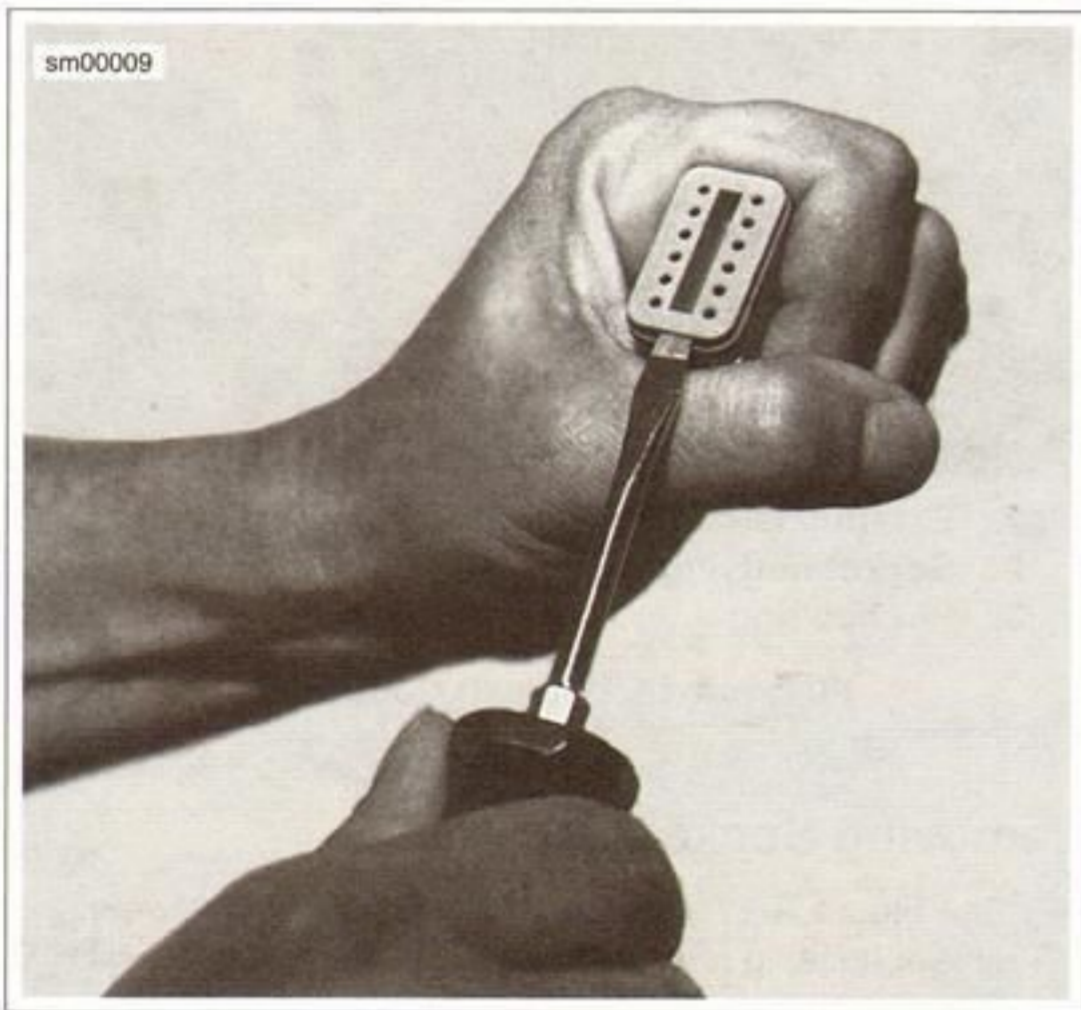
Deutsch Connector: Remove Secondary Locking Wedge
